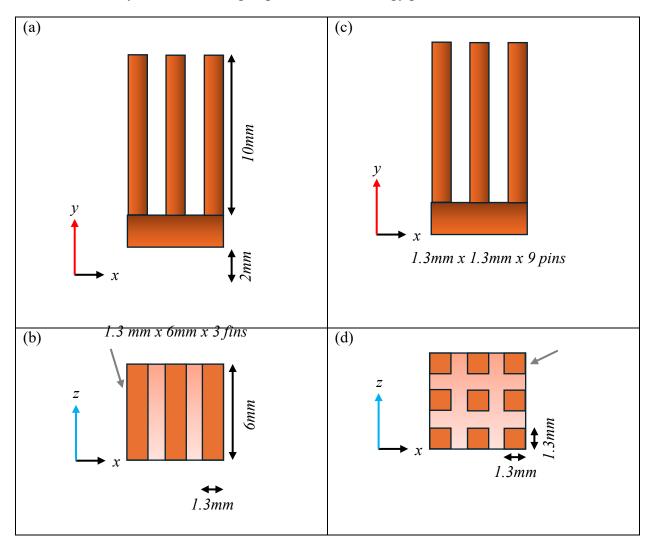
Front view of the 3-fins heat sink (a), top view of the 3-fins heat sink (b), front view of the 9-pins heat sink (c), and top view of the 9-pins heat sink (d)
